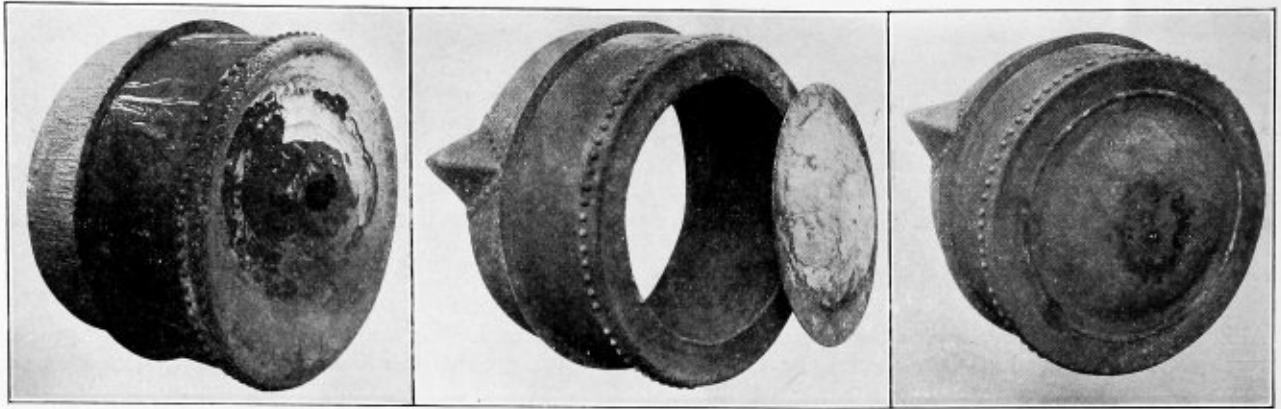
Compound Kettle, With Hole Burned in Bottom Plate
